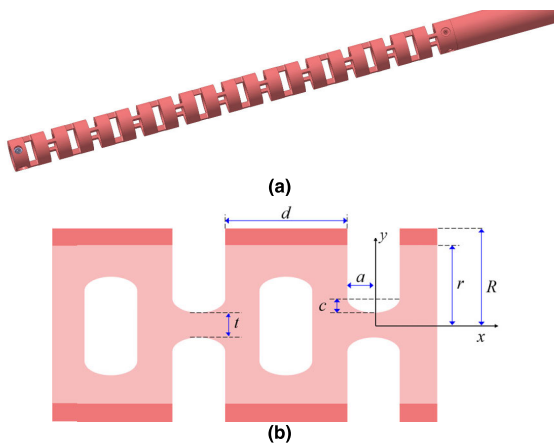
Designed flexure shaft (a) 3D model and (b) cross-sectional view of the elliptical hinges.
